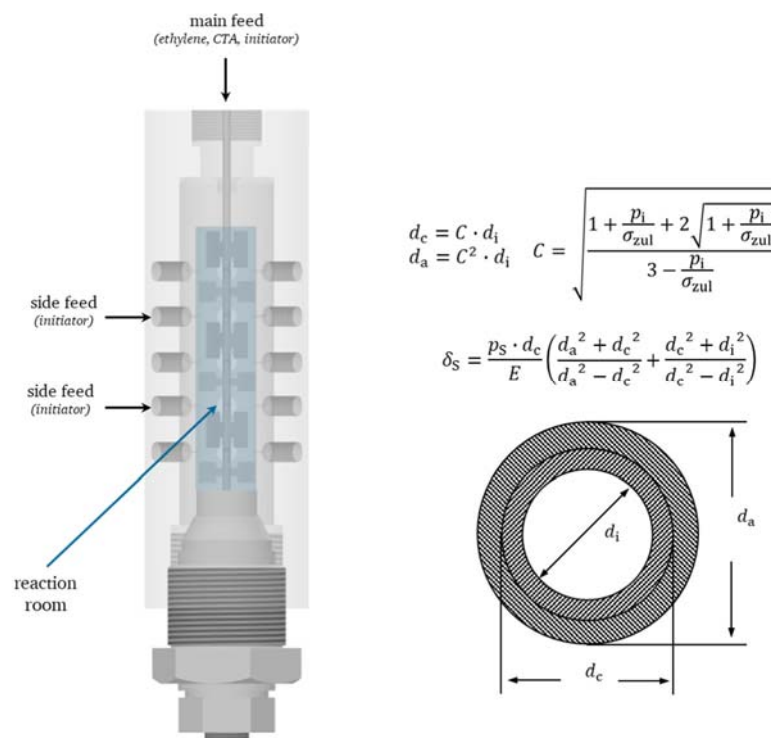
CAD-drawing of the 300 mL multi-zone autoclave with 30 boreholes to introduce thermocouples and side feeds. On the right: Method to design a shrink construction.
